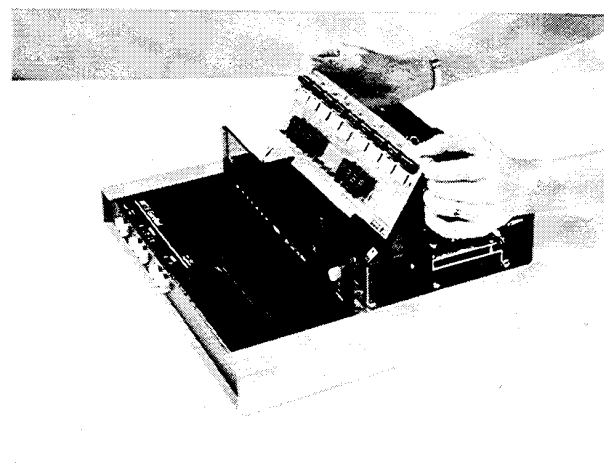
Removal of the display board. Note: The personnel grounding strap that is required is not shown in this and other disassembly views. (The model was wearing it above the elbow.)
